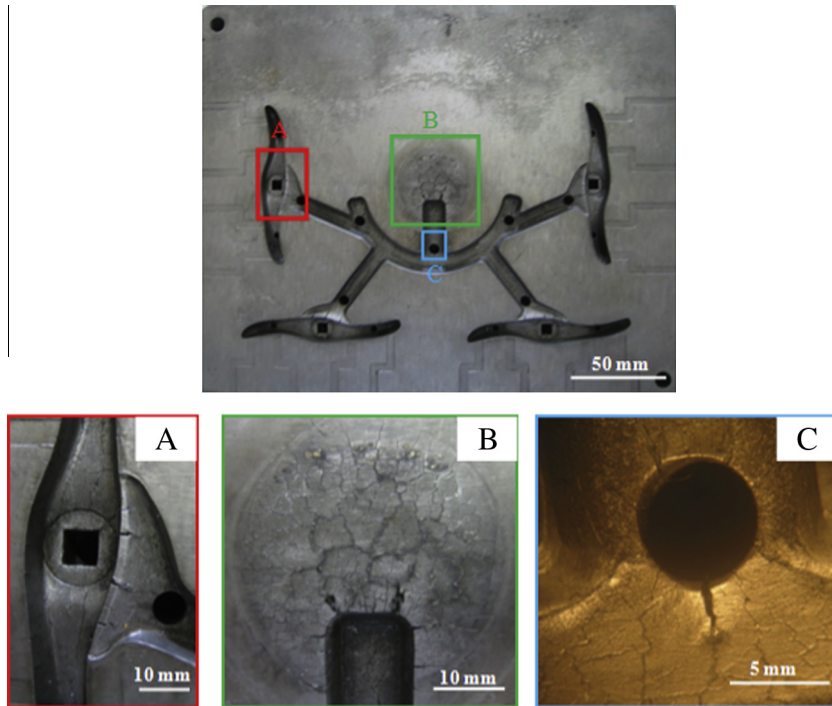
Typical macroscopic surface damages observed on the different zones A, B and C on the casting die failures.
